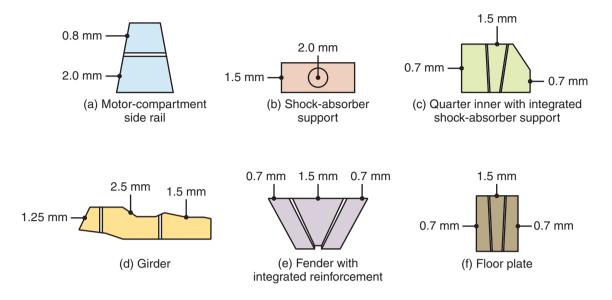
Examples of laser butt-welded and stamped automotive-body components. *Source:* After M. Geiger and T. Nakagawa.
